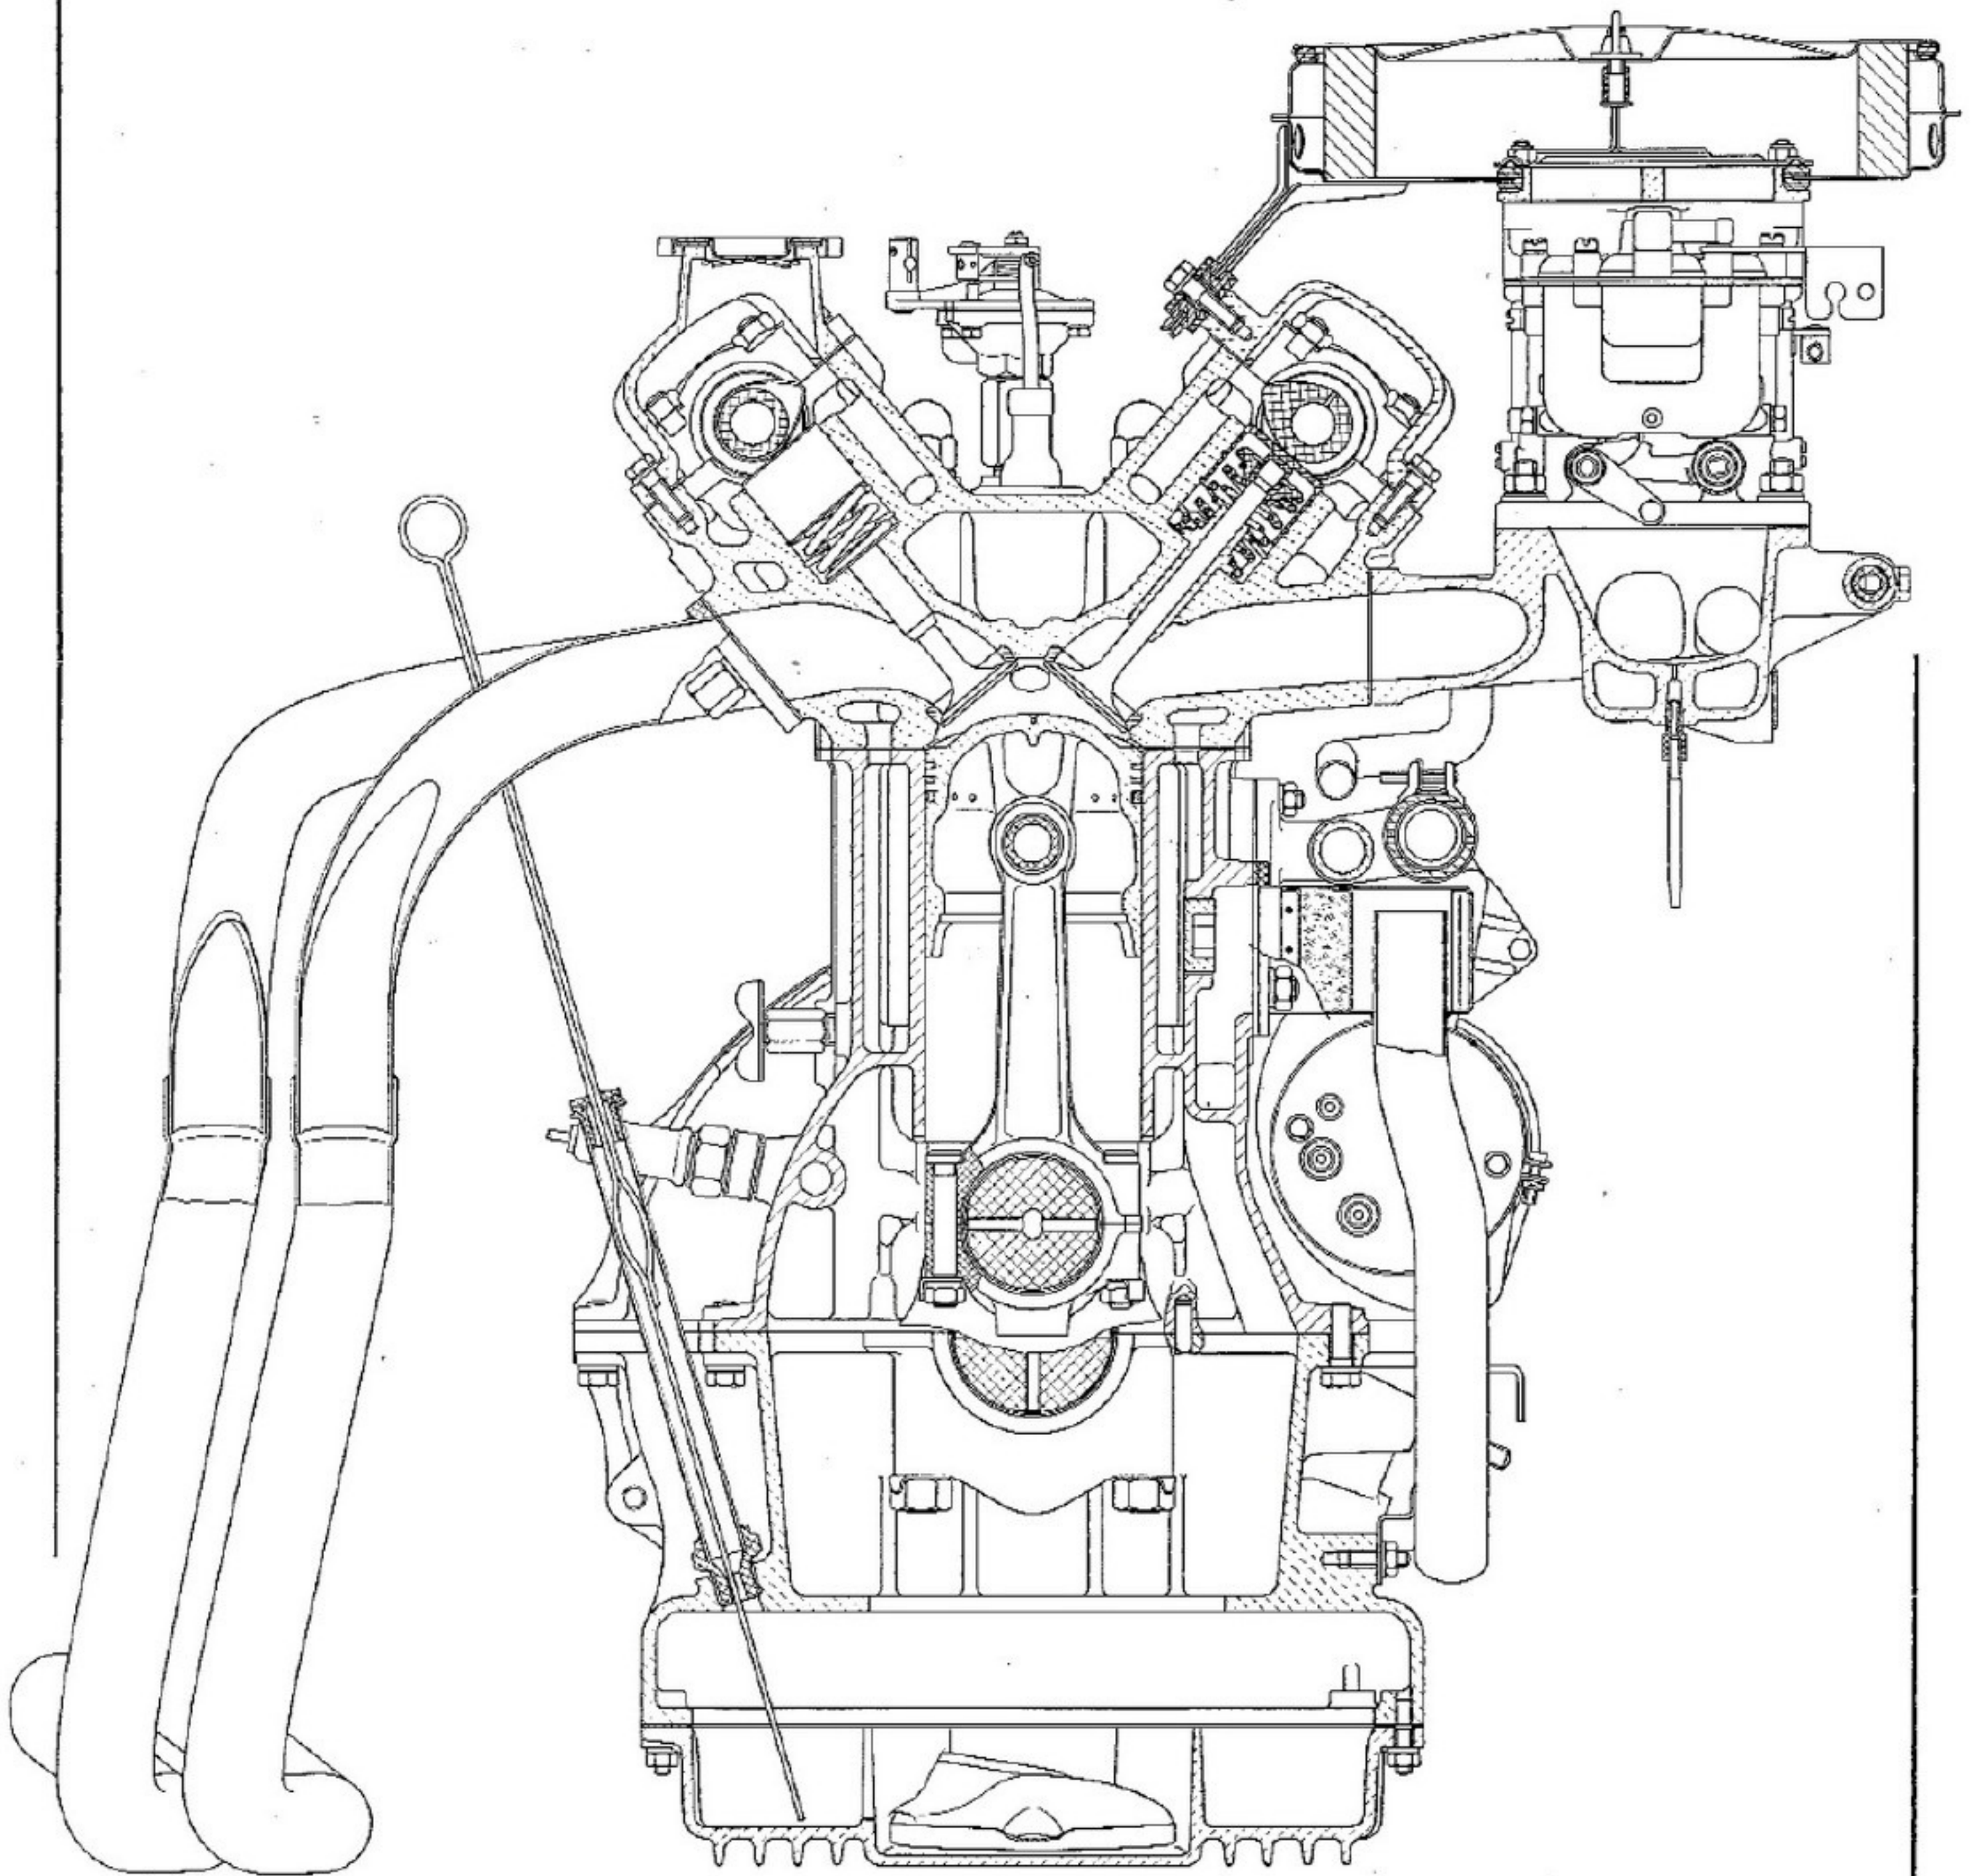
Engine type 118 A.000 - Section through piston, connecting rod and valves (exhaust on the left and intake on the right).
